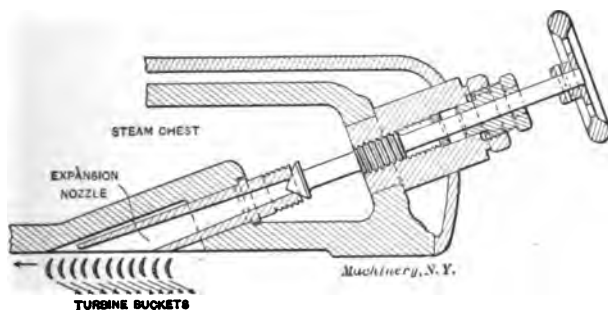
Section through Nozzle of a De Laval Steam Turbine
